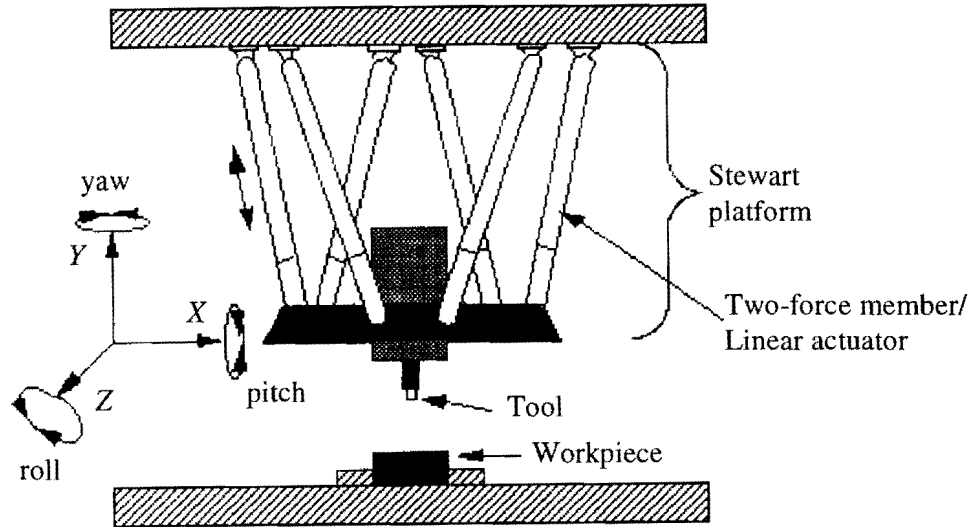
Schematic of a Hexapod six-axis machining center.
